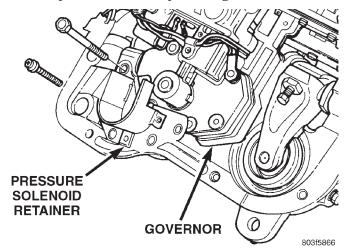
Governor Body And Retainer Plate Attaching Screw
